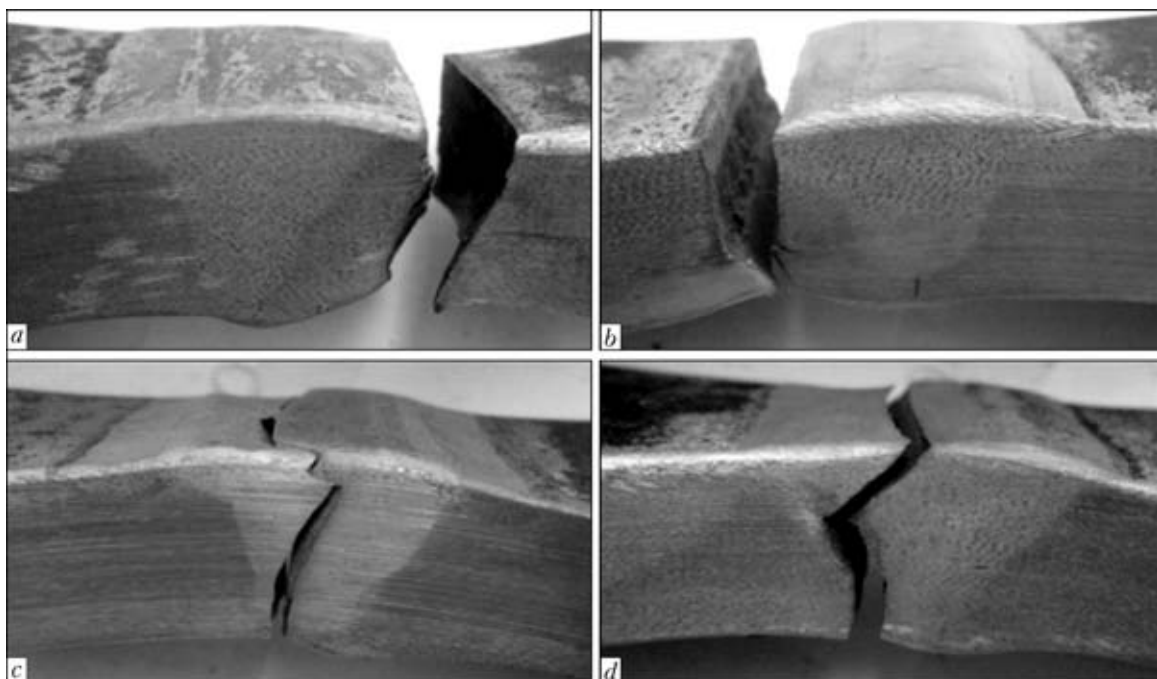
Character of fracture at fatigue test of joints of submerged-arc welded steel of grade X80 in the state after welding (a), argon arc treatment with partial melting of a weld (b), transition places from weld to base metal (c) and high tempering (d)
